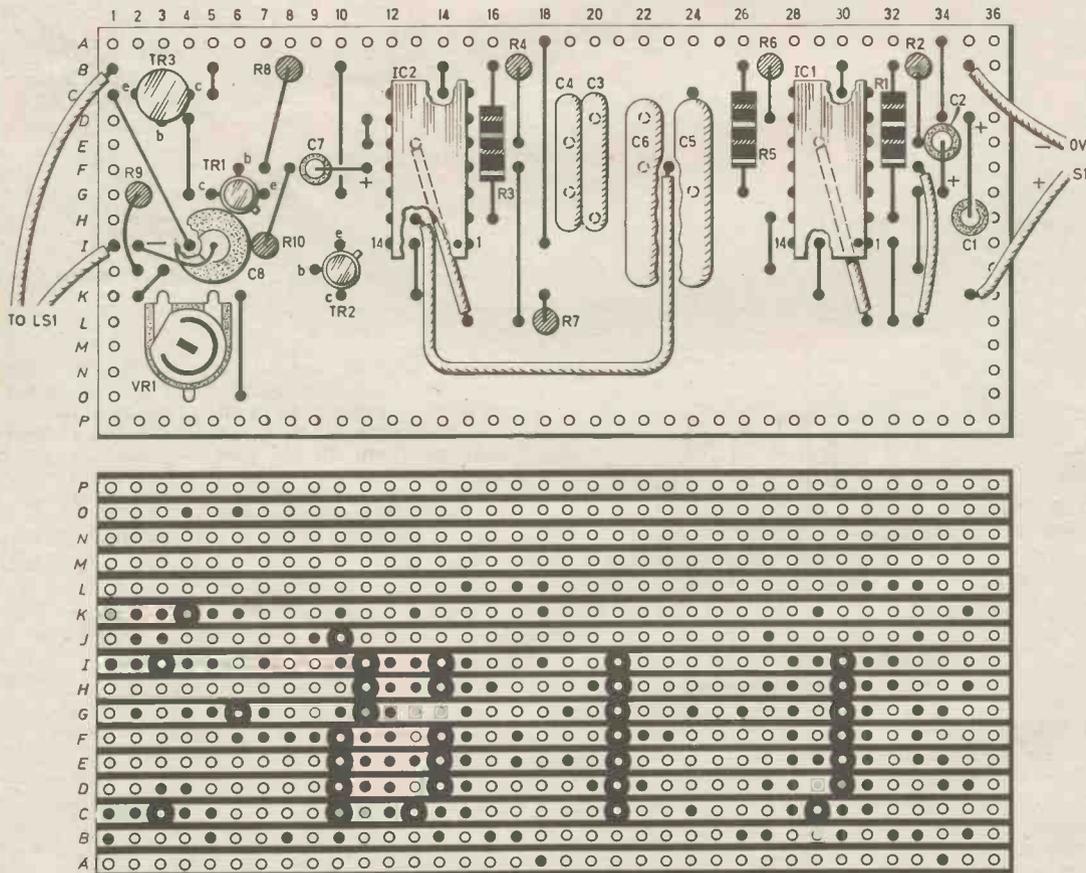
Stripboard layout for the Alarm section only. Note links beneath the i.c.s.
